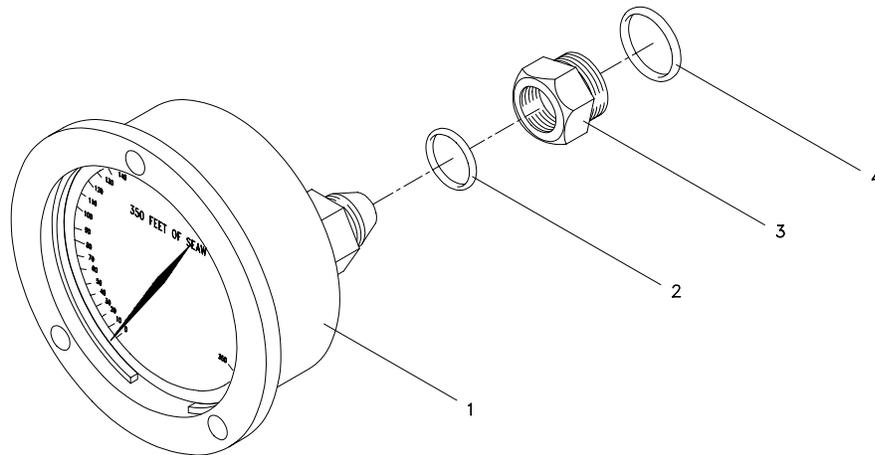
Diver Depth Gauges (ALP-G318, ALP-G319, ALP-G320)
